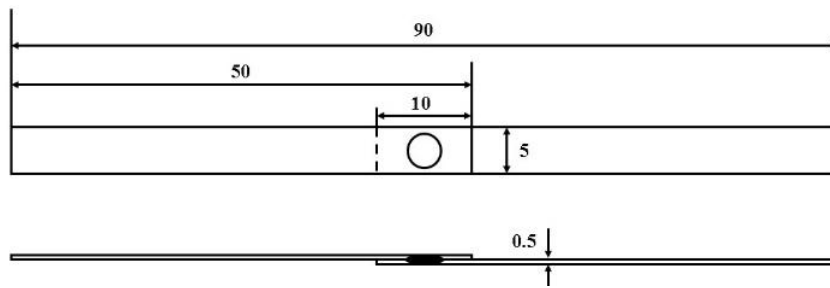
Size and shape of resistance spot welding specimens (unit: mm)
